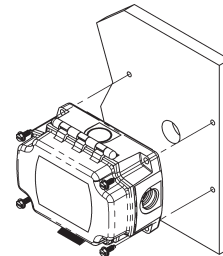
BAPI-Box enclosure mounting holes, rotate 90° for horizontal mount
